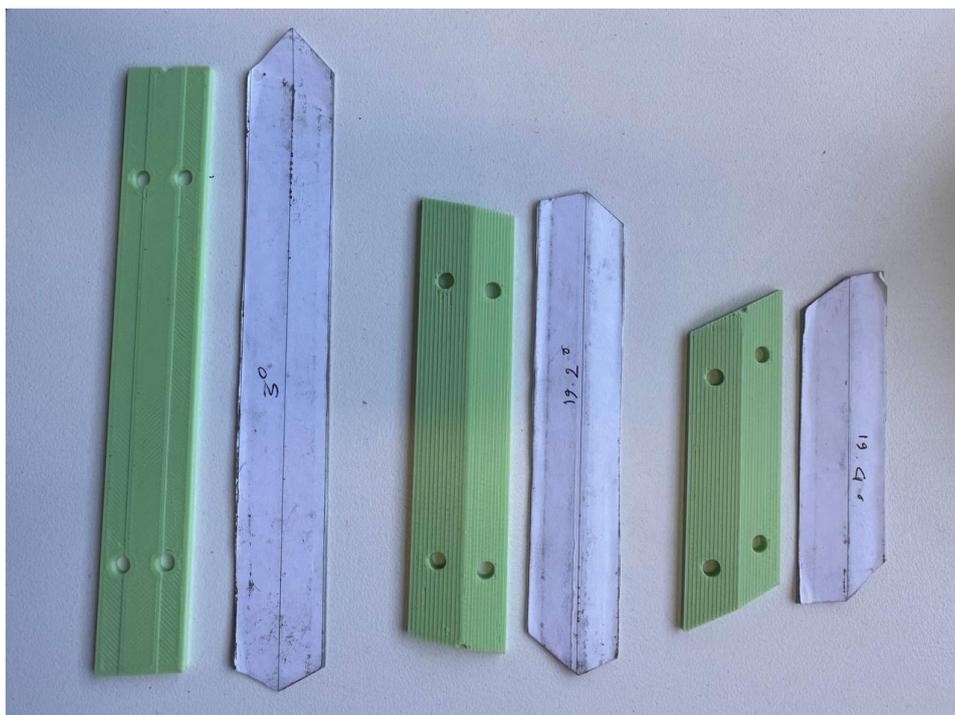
First and second joints prototype; Same joints using bent steel and 3D printed with holes
